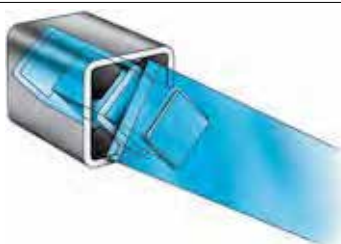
Plug-in connection with lever and welded-on square steel piece
